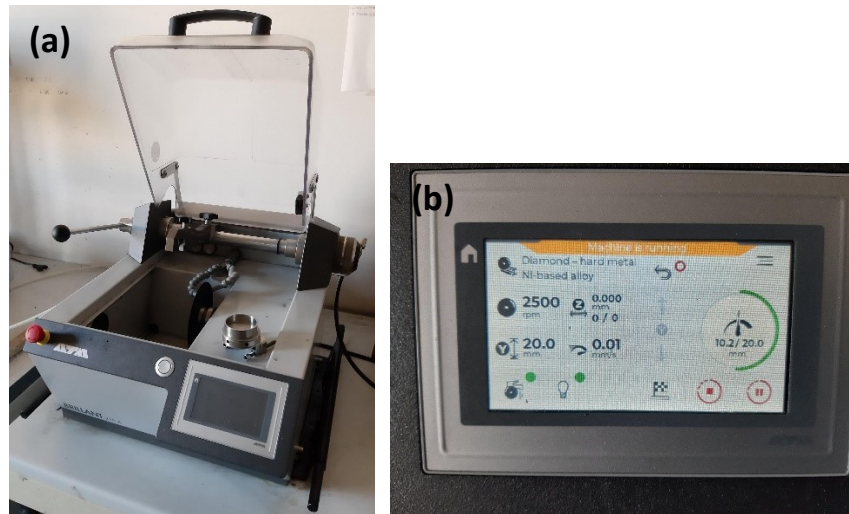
(a) Cutting machine; (b) Cutting parameter.
